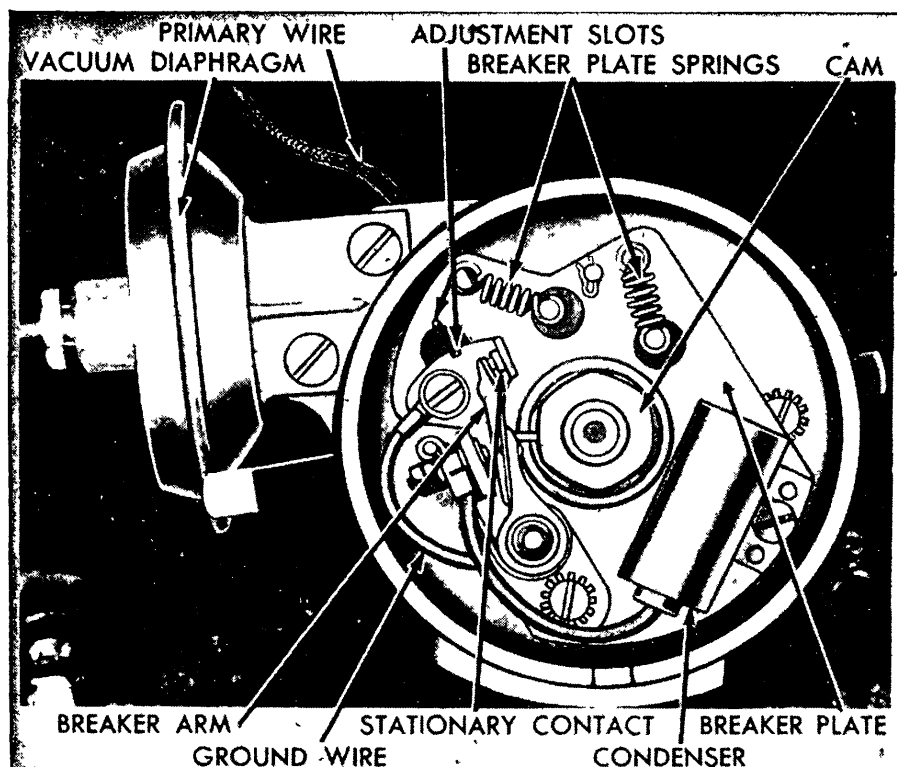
Breaker plate details of 1949-51 Ford Six distributor
